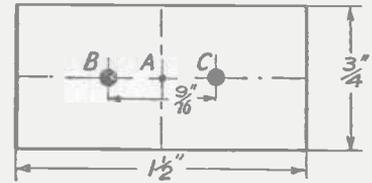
Dimensions for a jig for inductance coil sockets.
